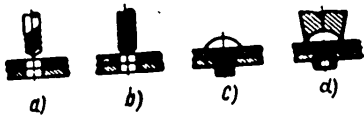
Schematic Diagram of Installation of Explosive Rivets
